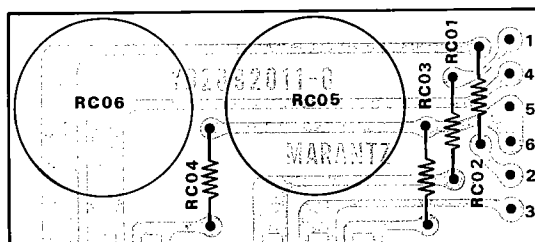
FM Cal. and De-Emphasis Assembly PC01 Component Locations
